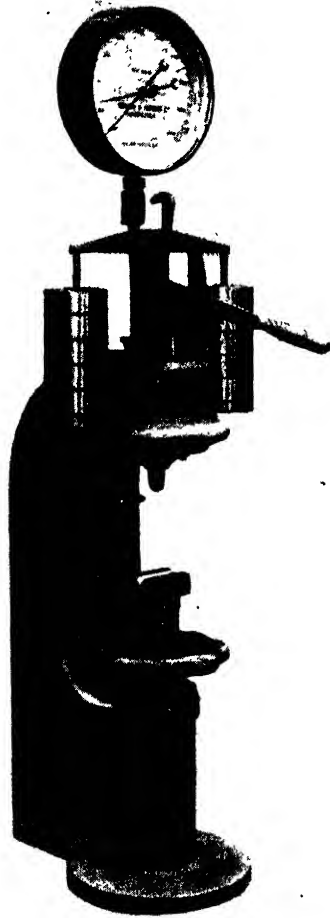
THE OLSEN HYDRAULIC BRINELL HARDNESS TESTING MACHINE
